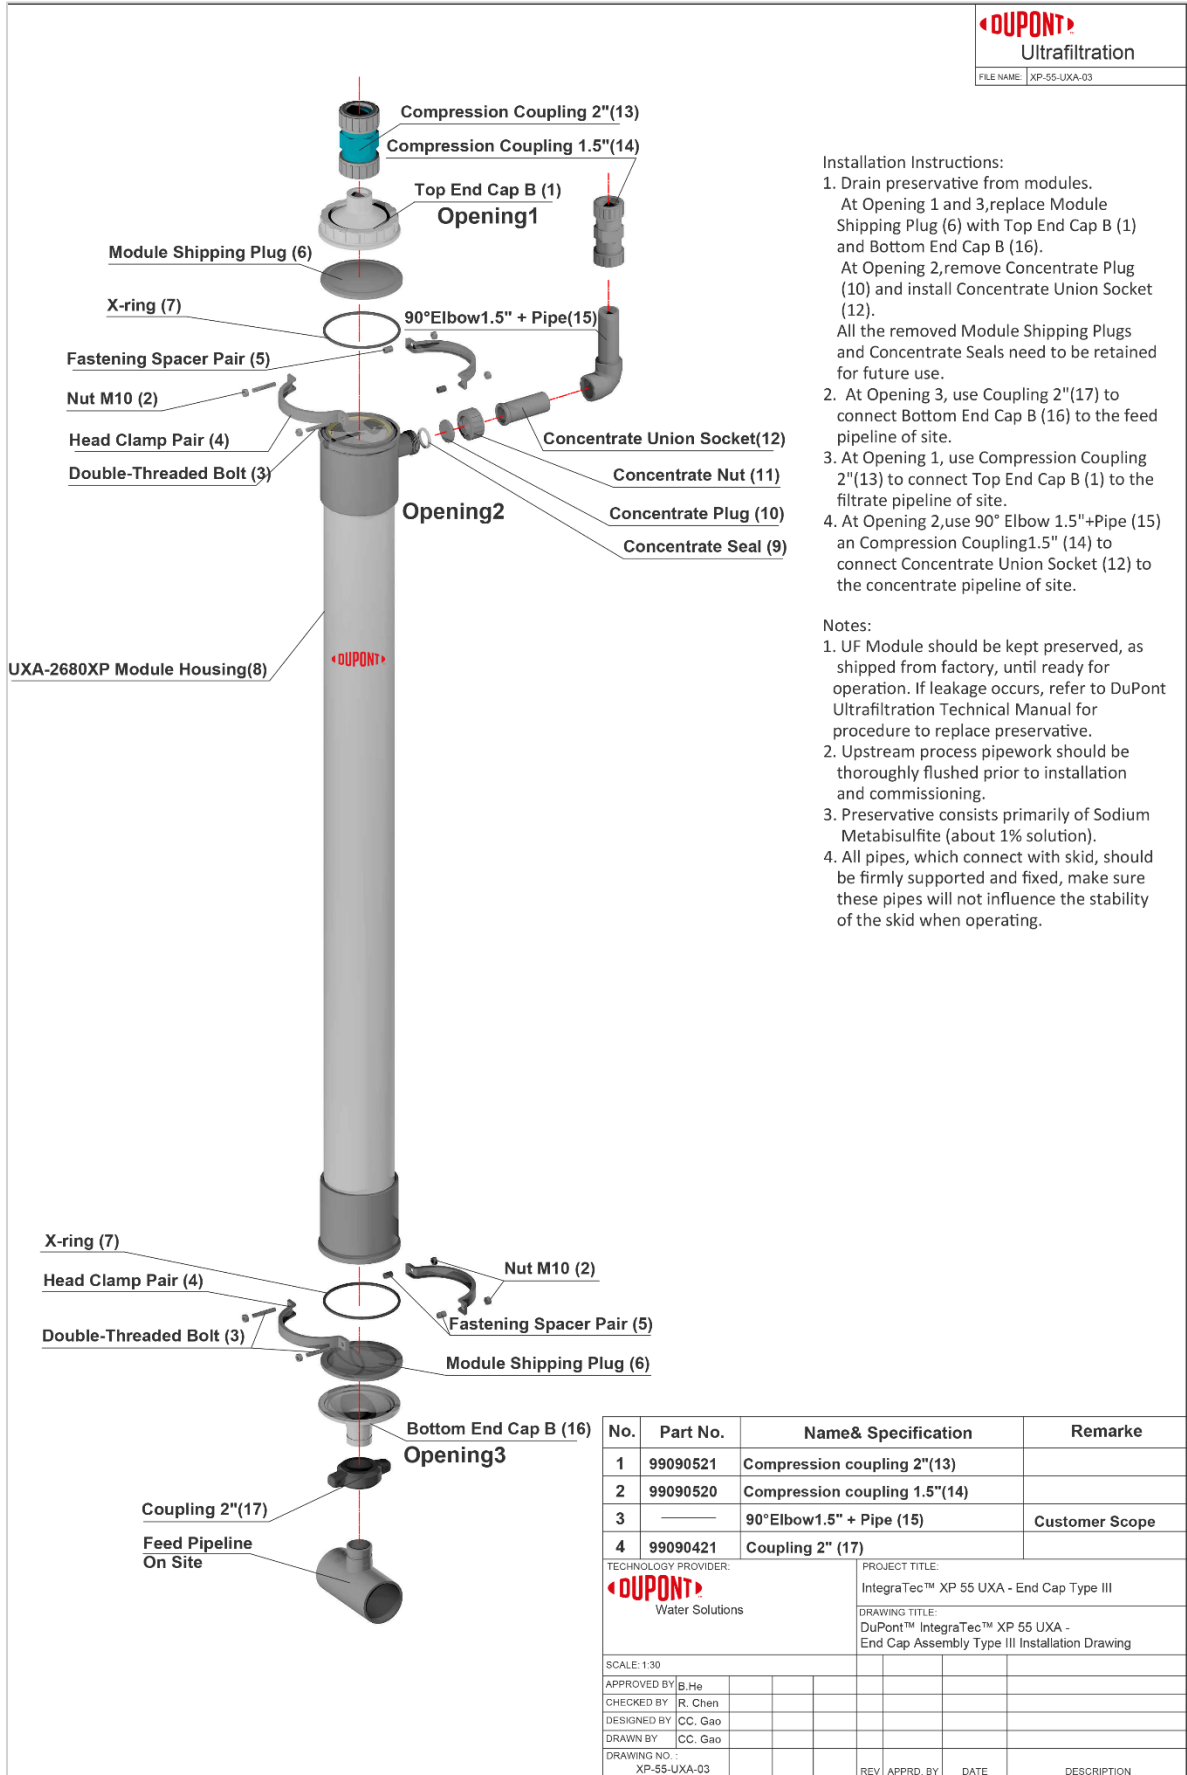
DuPont™ IntegraTec™ XP 55 UXA - End Cap Assembly Type III Installation Drawing
